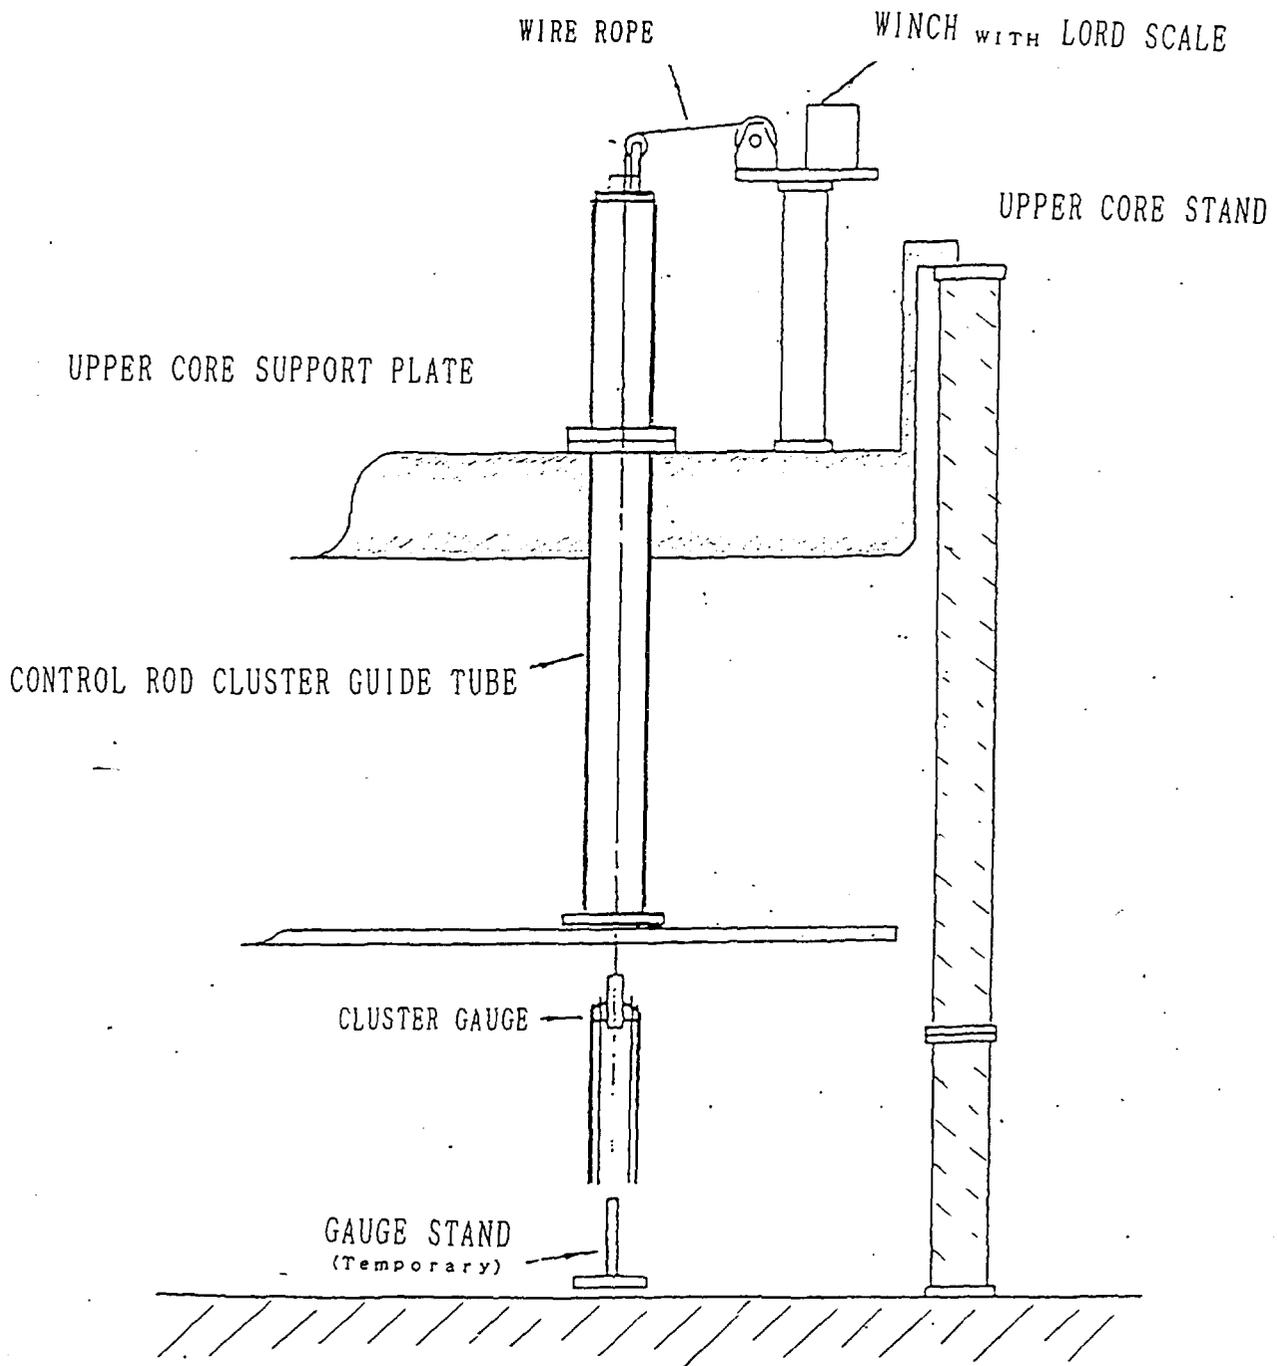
FRICTION TEST ON UPPER CORE SUPORT STRUCTURE
